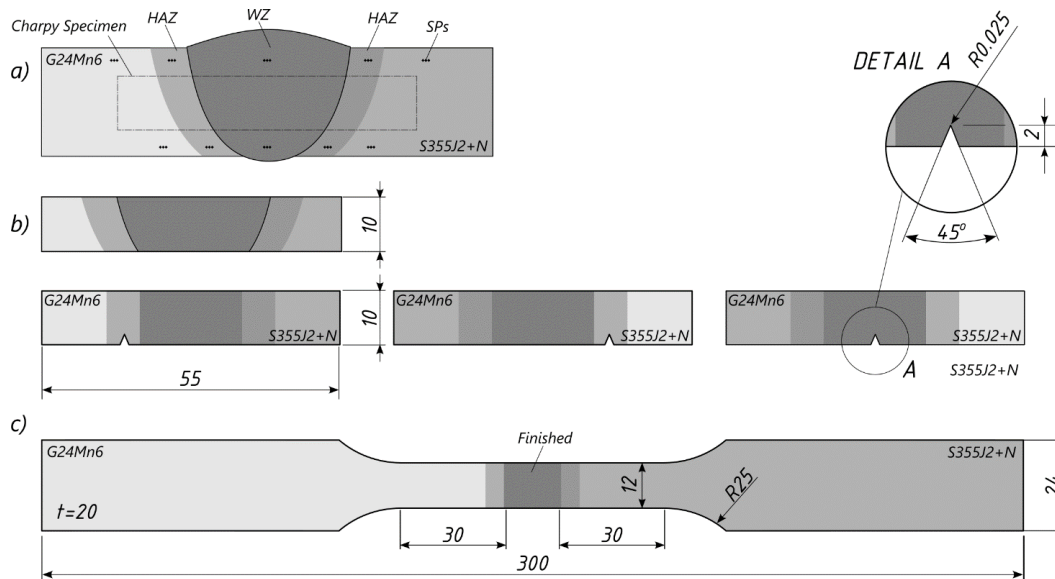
Test specimens and hardness measurement (HAZ: Heat affected zone, WZ: weld zone, SPs: Sampling points). (a) hardness specimen; (b) Charpy test specimens with different notch zones; (c) tensile test specimen
